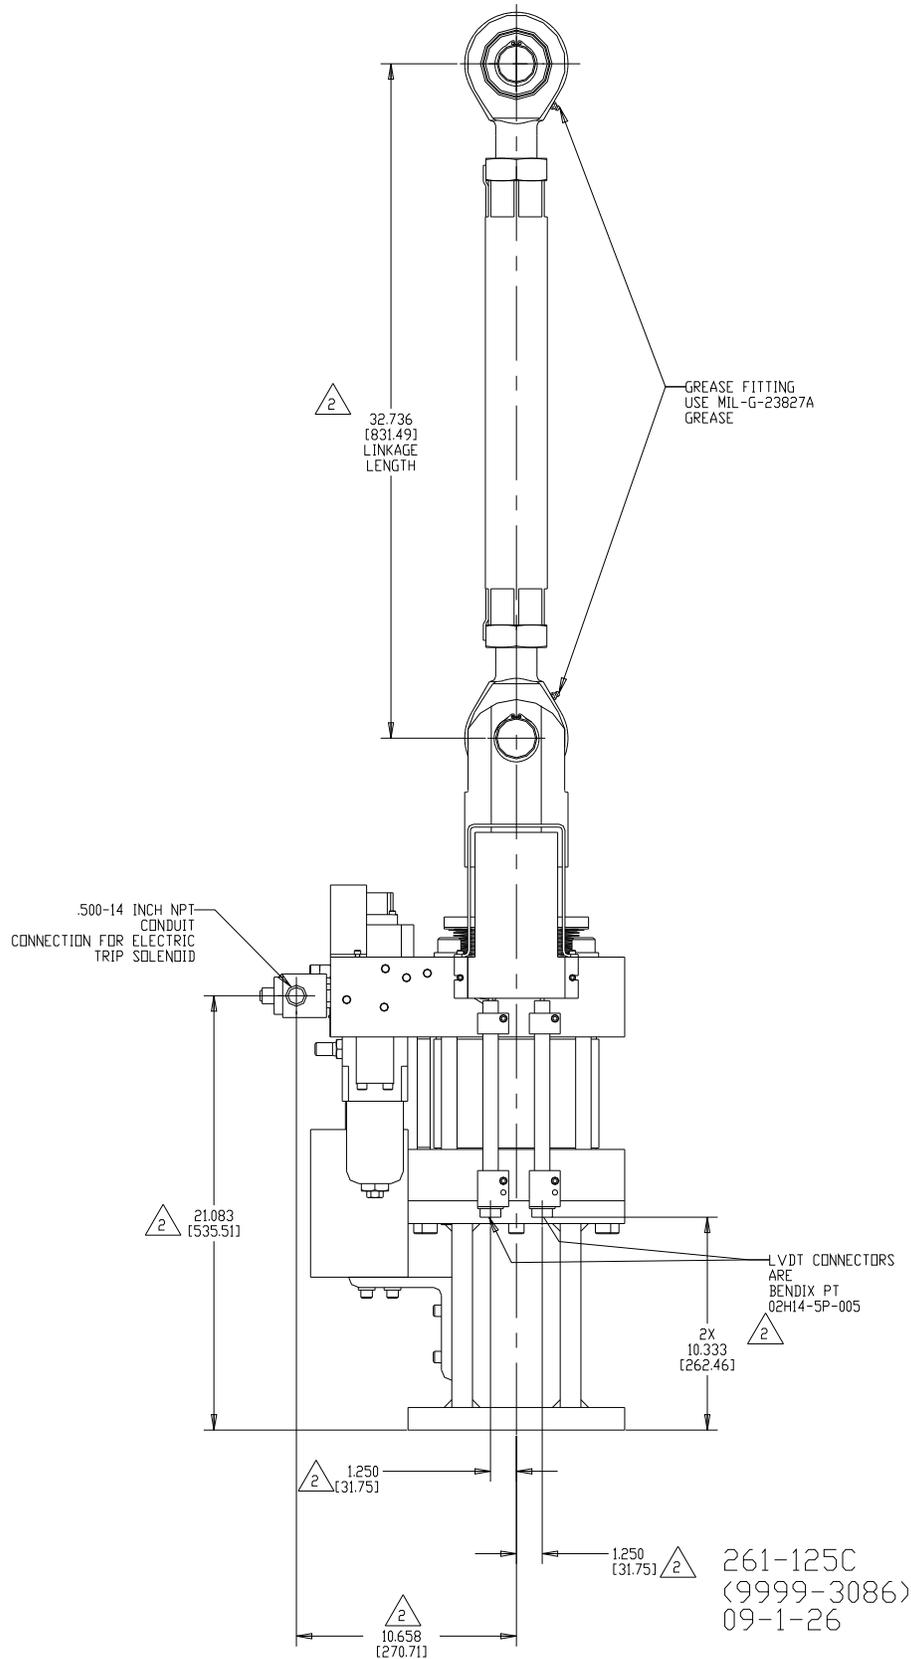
9F IGV Actuator with Electric Trip and SAE O-ring Thread Type Connection (right side view)
